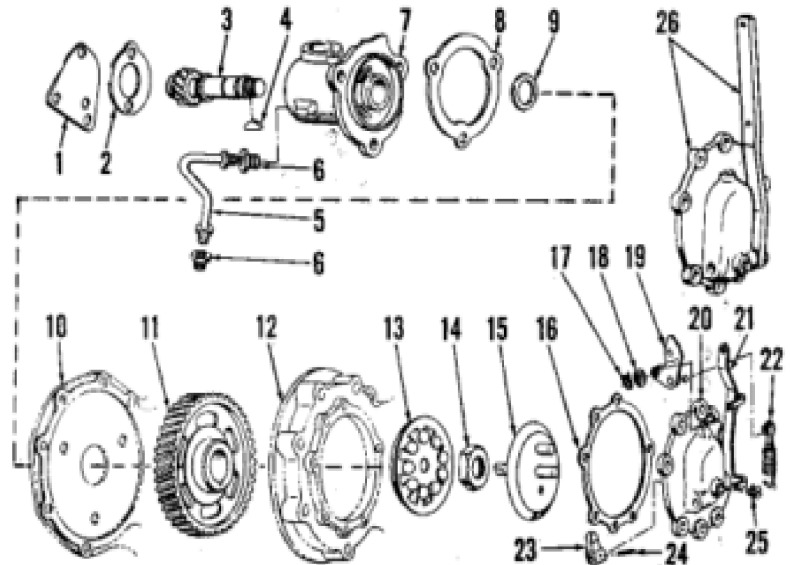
Exploded view of non-diesel governor and distributor drive assembly. Governor housing and lever assembly (26) is used on late 3 cylinder units. On early 3 cylinder, governor spring (22) is connected between throttle arm (21) and governor arm (19).
